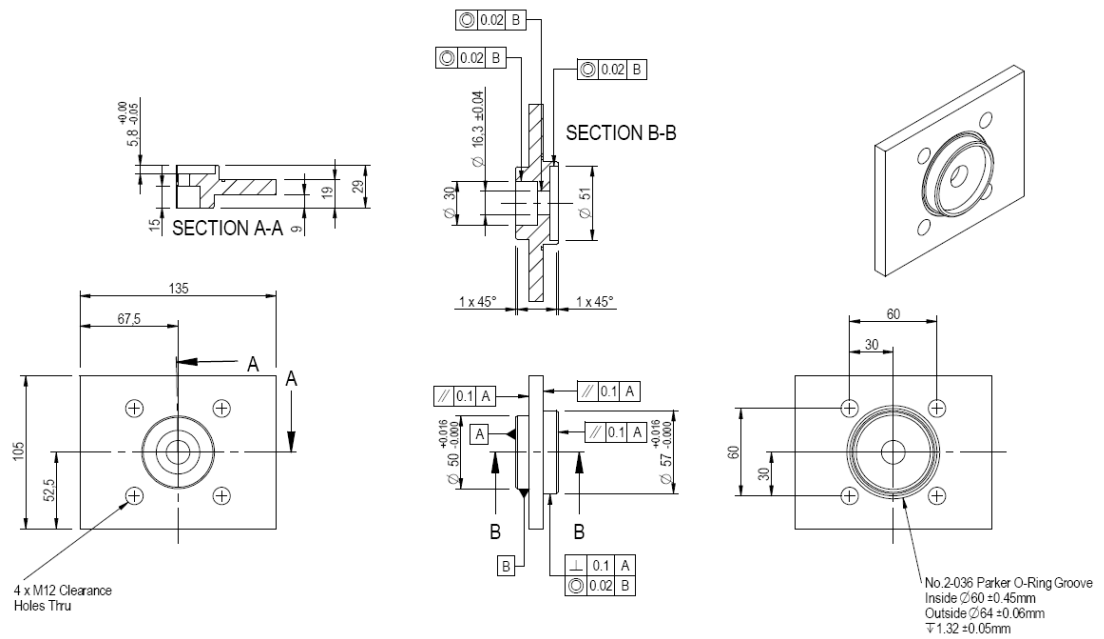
Internal housing block forming one of the faces of the seal groove in active seal assembly
